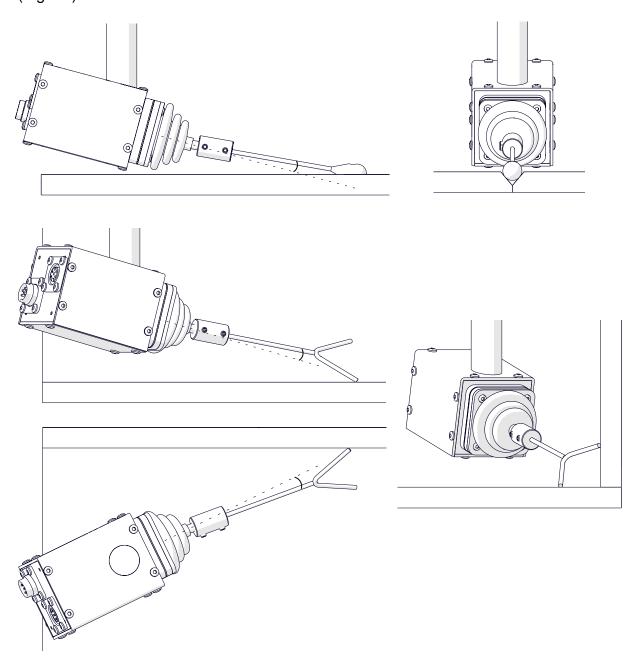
Setting the tracking sensor correctly in the welding seam
